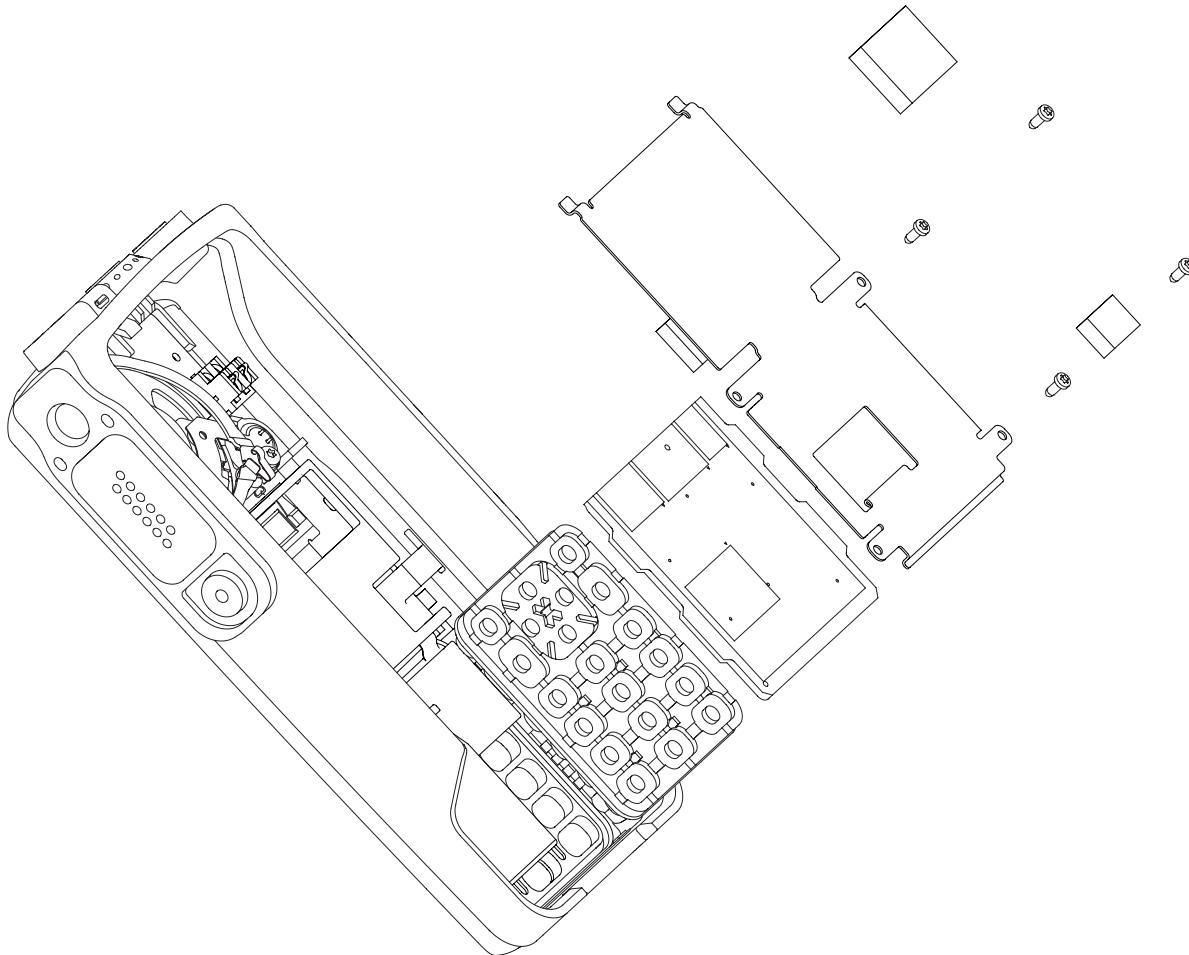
Keypad, Display, and Keypad Board reassembly for Full Keypad
